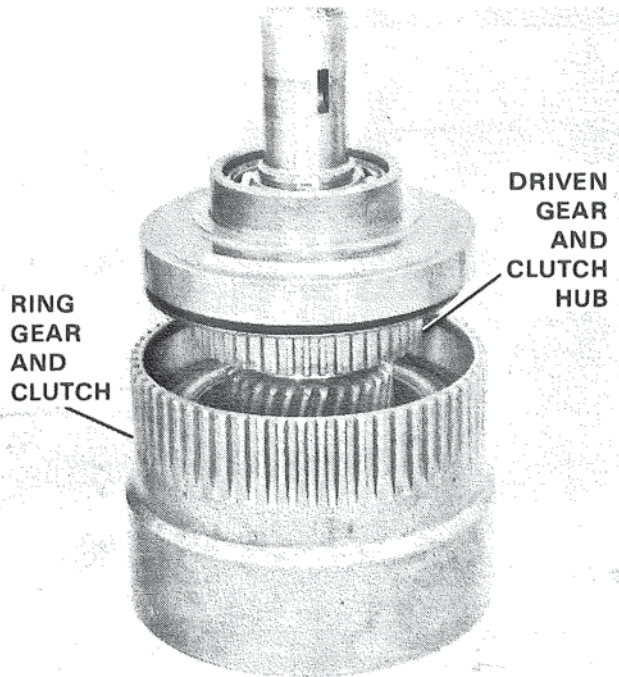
Removing Ring Gear and Clutch Assembly from Drive Gear.
